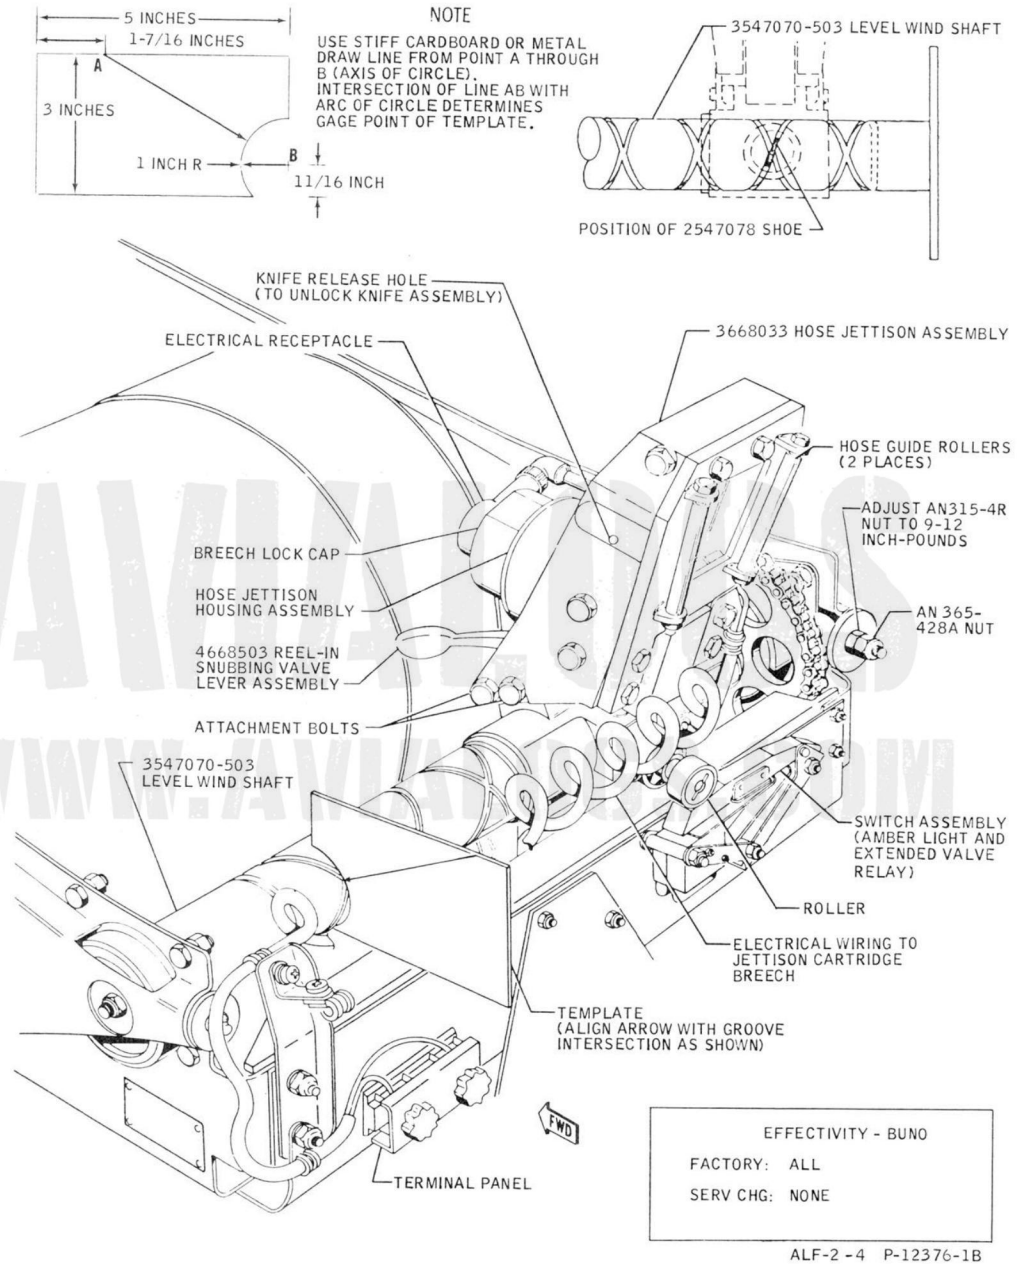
In-Flight Fueling Store Hose Cutter Assembly (Guillotine) (Sheet 1)
